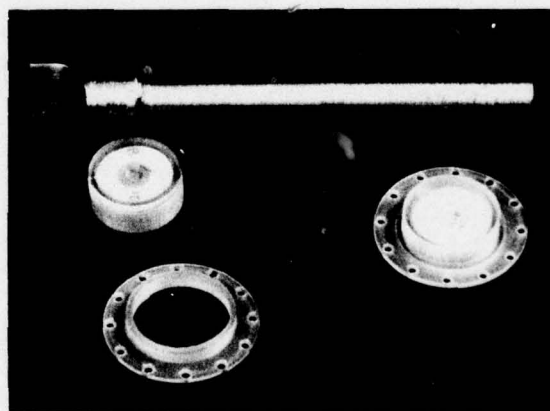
Flange design for the transensor. The transensor and threaded flange are shown both separately and assembled. The screwdriver for advancing the transensor in the flange is shown in the background.
